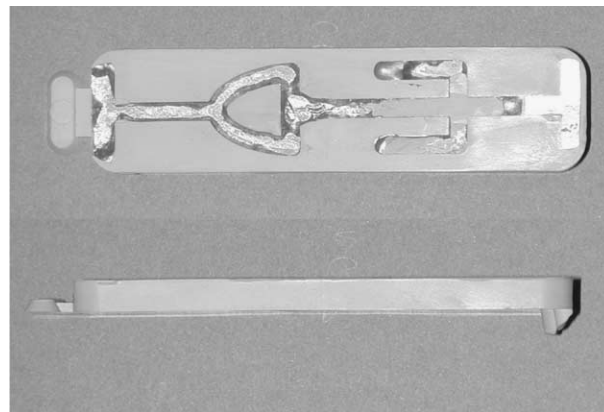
Removal of the core by induction melting from a sample moulded with PE binder.
